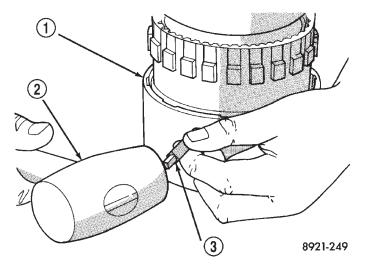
Marking Direct Clutch Drum And Annulus Gear For Assembly Alignment
